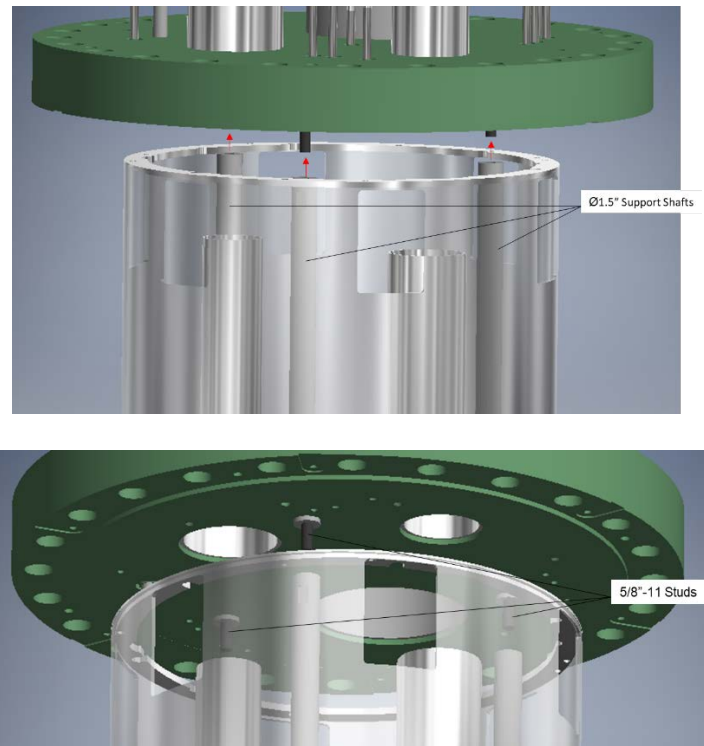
Drawing showing inner vessel offset from flange to illustrate support rod mounting location for inner vessel, top, mounting locations with studs installed in primary flange for support rods, bottom.
